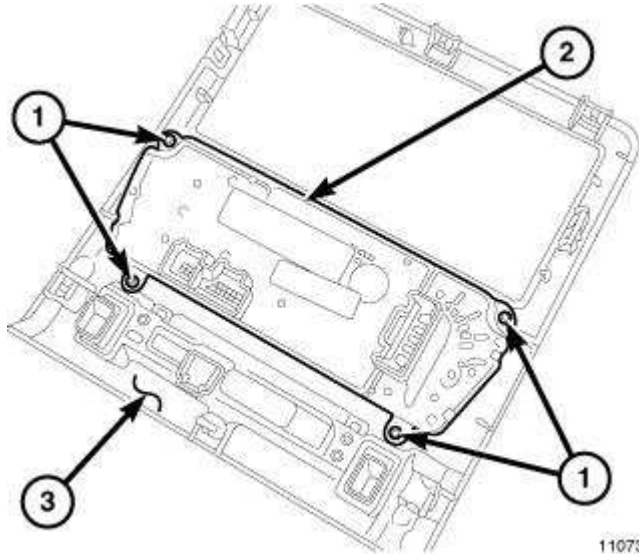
Removing/Installing A/C-Heater Control At Rear Side Panel Center Bezel
